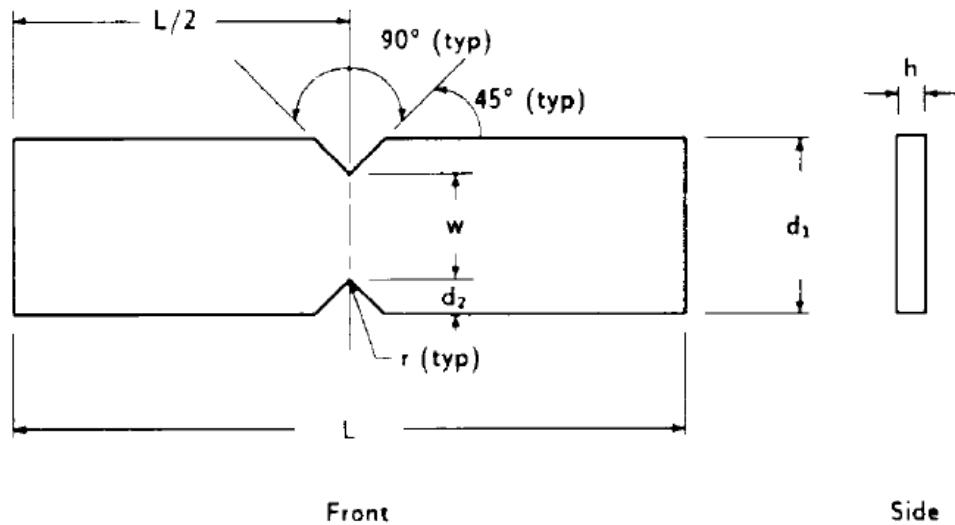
Specimen construction as per ASTM D2344 for Short Beam Shear Test
